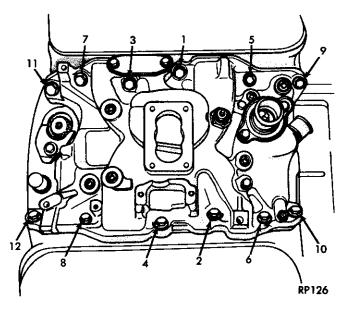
Intake Manifold Bolt Tightening Sequence—3.9L
